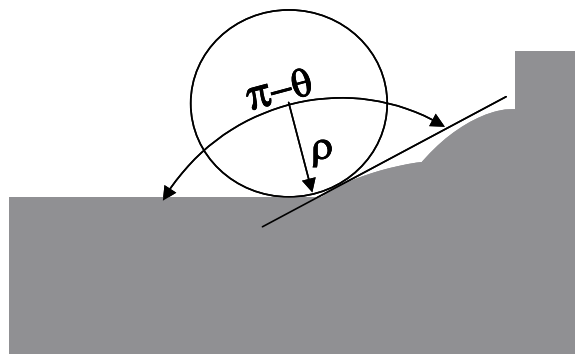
Definition of the radius and the flank at the weld toe
